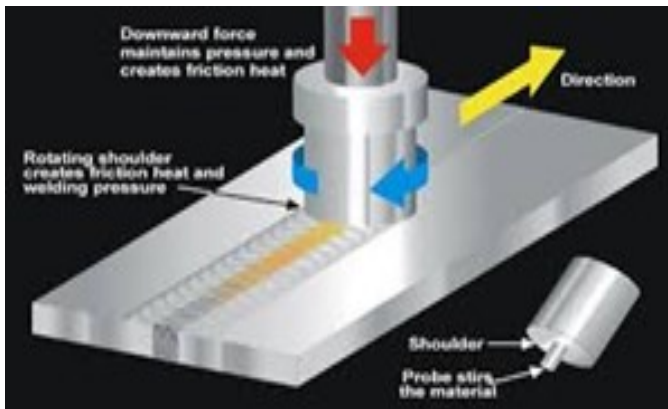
Schematic Diagram of Friction Stir Welding
